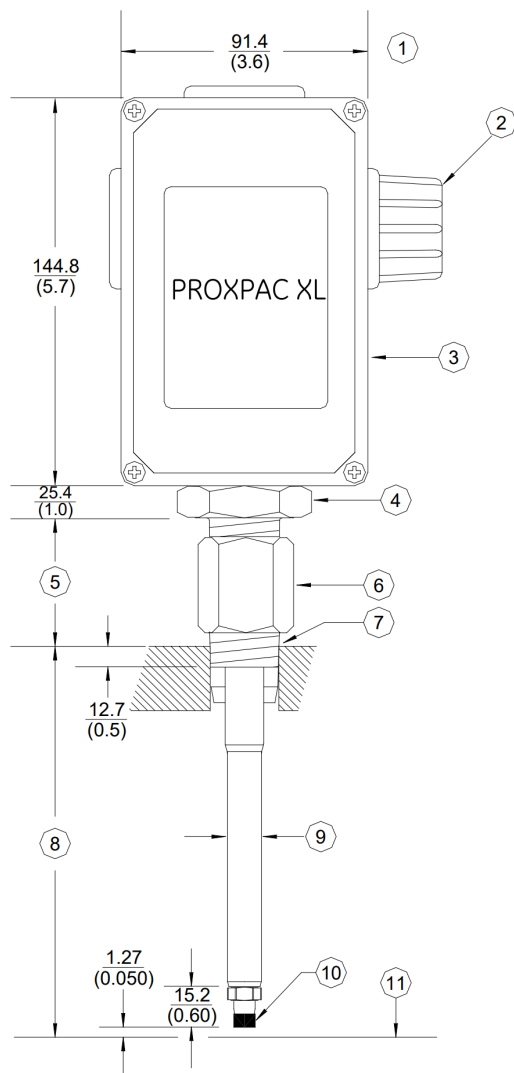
Dimensions for PROXPAC XL Proximity Transducer Assembly
